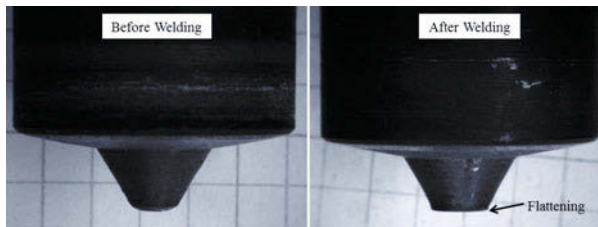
Photographs of the W-25%Re-6%HfC pin tools before and after the first FSP pass.
